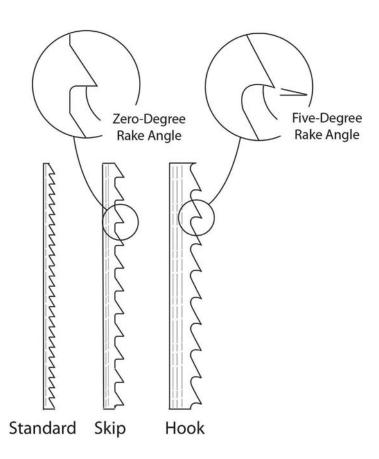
bandsaw teeth are available in one of two shapes: 0° rake angle and 5° rake angle. The standard tooth and skip-tooth have a tooth face that is 90° to the body of the blade, called 0° rake angle. The hook tooth has a slight positive angle, called 5° rake angle
